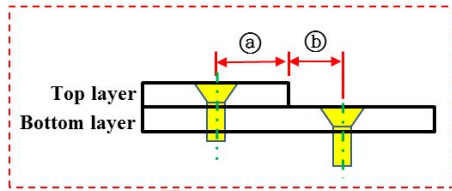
Sizes of artificial corrosion around stepped rivet fasteners on a specimen;
